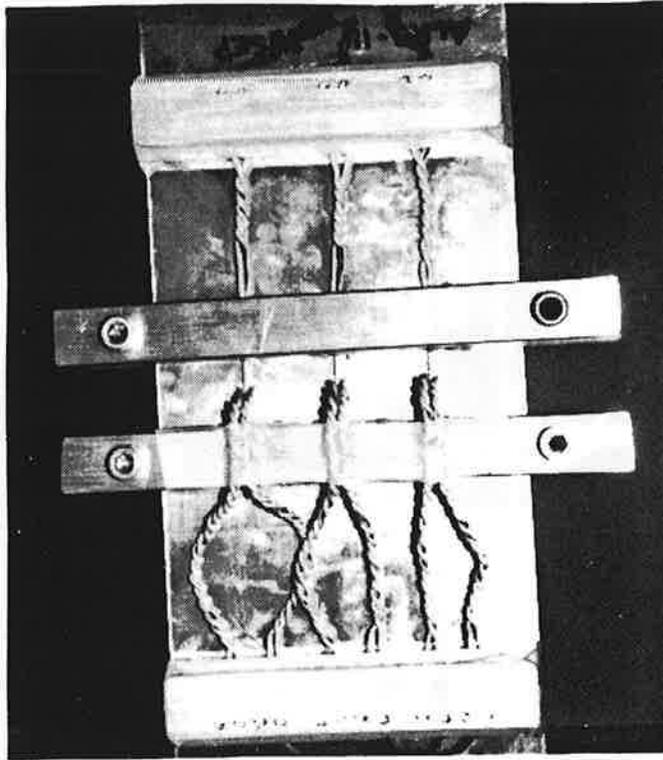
PICTURE OF RIVETED ALUMINUM PANEL
